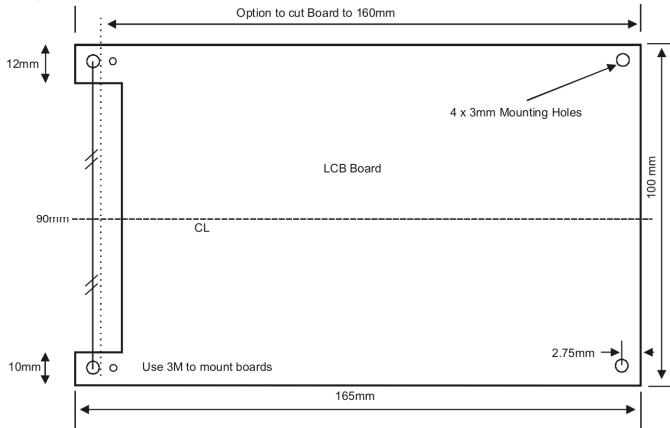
DIN Rail Mounting (D2) Dimensions
